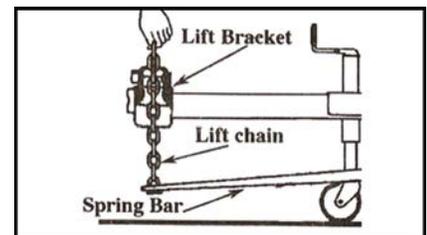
Center the lifting bracket parallel with the spring bar chains.
